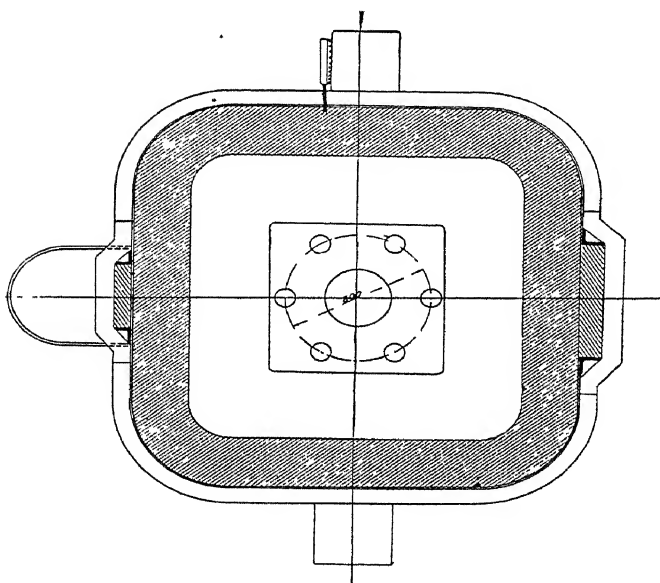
PLAN OF 2.5-TON GIROD ELECTRIC FURNACE.
